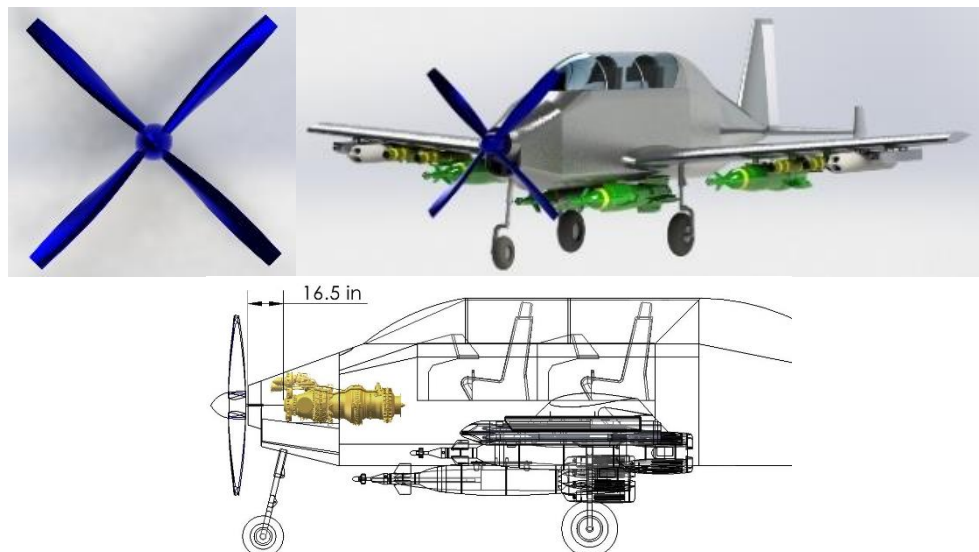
SolidWorks CAD model of propeller. Powerplant location is also shown [2].
